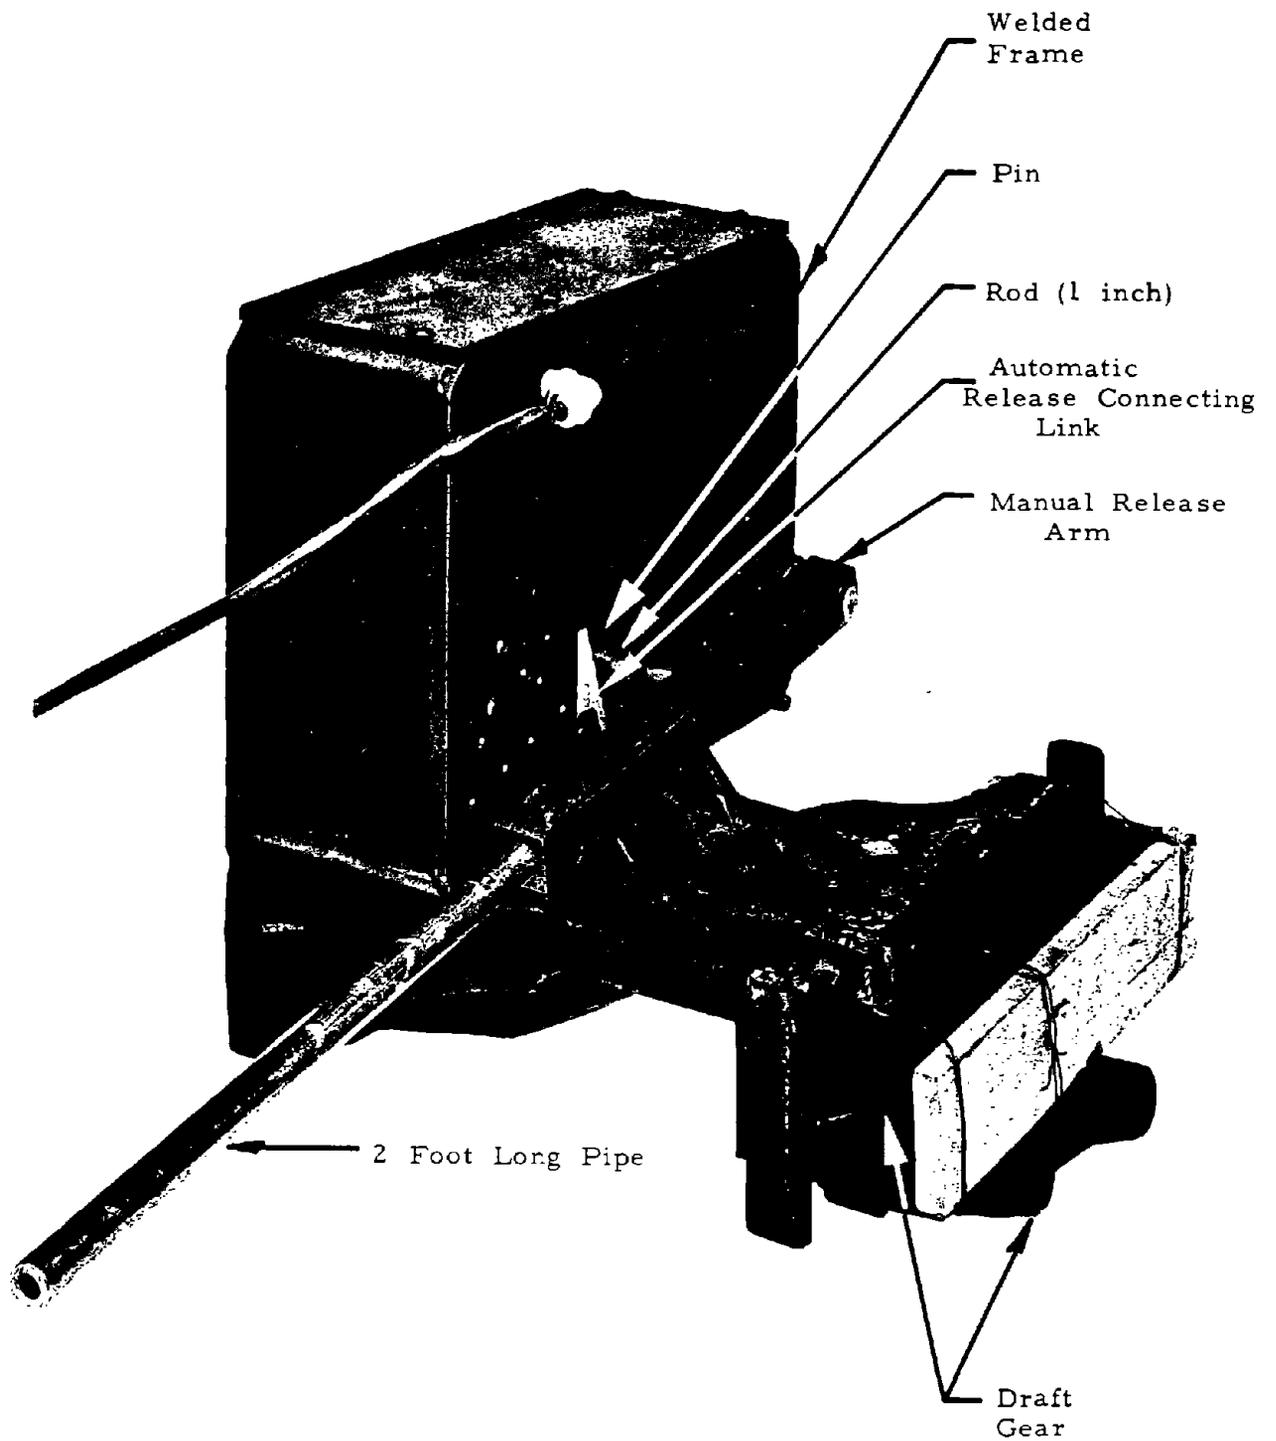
A one inch diameter rod protruding from the release arm works against a pin which is part of the automatic connecting link. Thus, when an upward force is applied to the pipe, the automatic connecting link rotates the modified coupler cam out of its locking position. Once again, as in the case with the electrical uncoupling mechanism, the manual release arm is mounted directly to the welded frame. The pipe will normally be carried in the locomotive or on the cars and its two foot length will enable manual uncoupling without the need of having a man between the cars. However, the only reason for manual uncoupling should be the failure of automatic remote operation.
